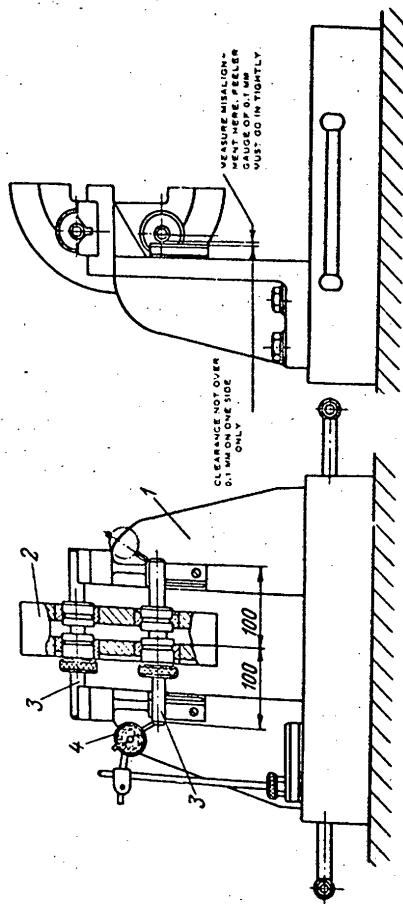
CHECKING PARALLEL ALIGNMENT OF PIN BUSHING HOLES IN CYLINDER PLATE
